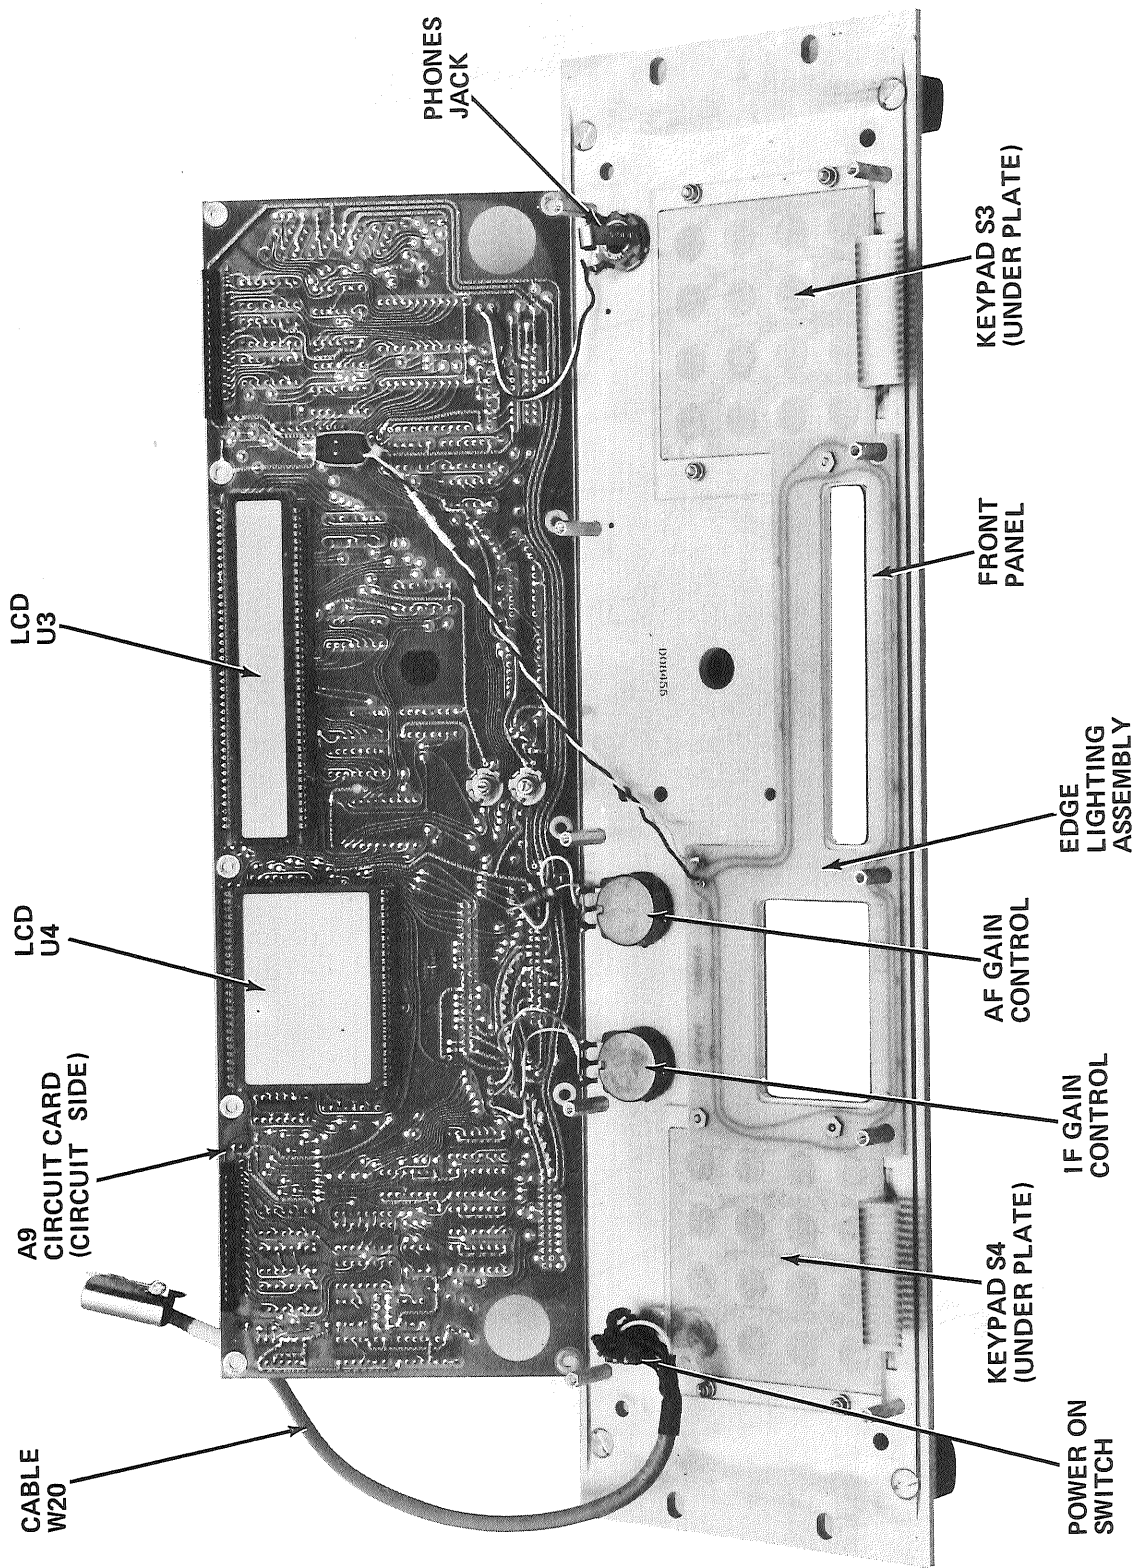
Front Panel (Assembly, Partially Disassembled.)
